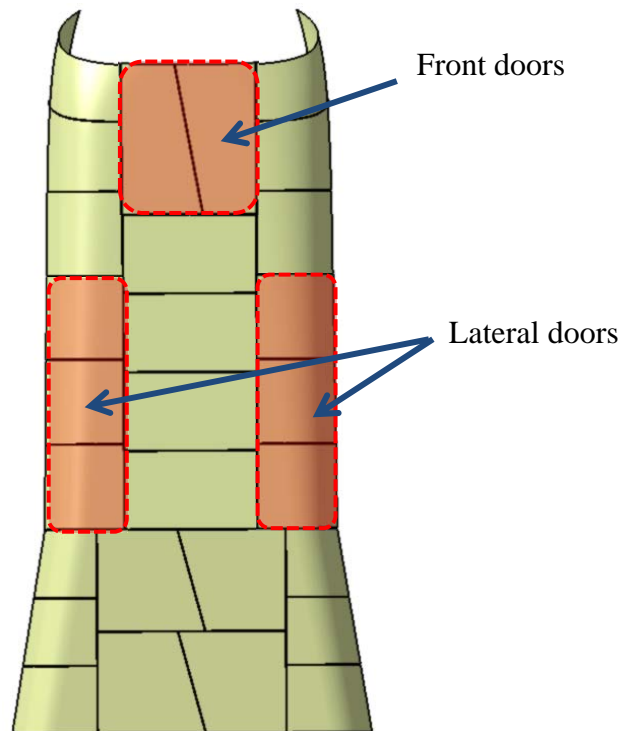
Space Rider shingle pattern and modified panel for landing gears doors
